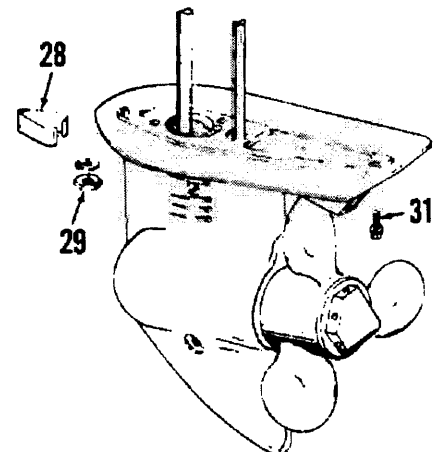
Lower unit may be removed from motor leg after removal of nut (29) and screw (31).
